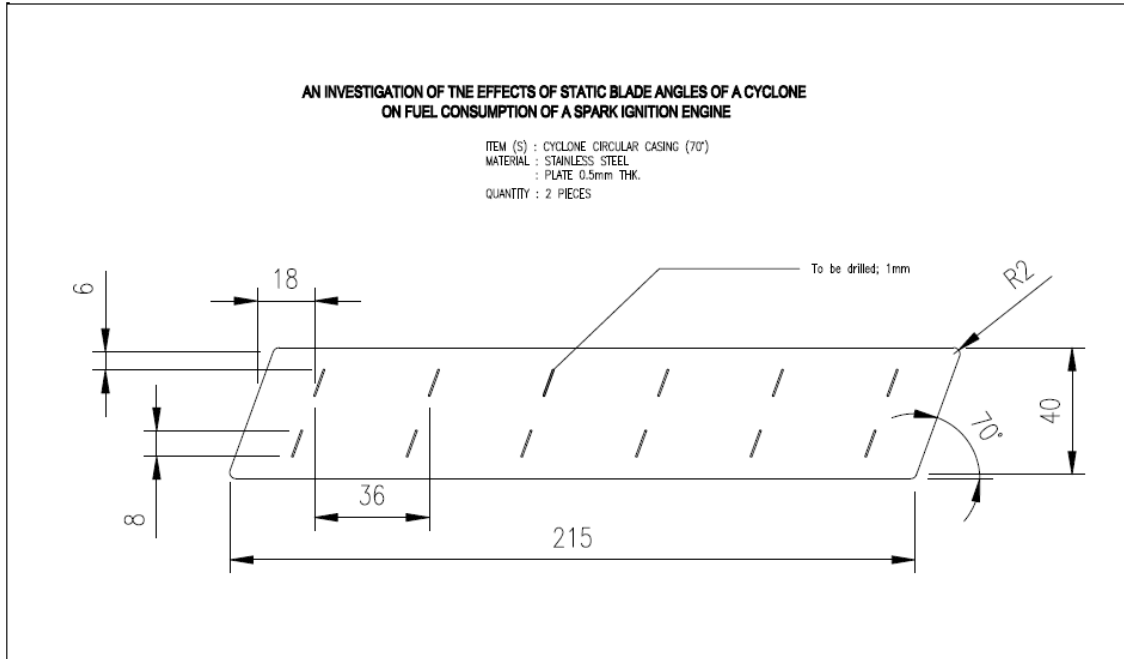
Drawing of Circular Cyclone Casing with 70°
